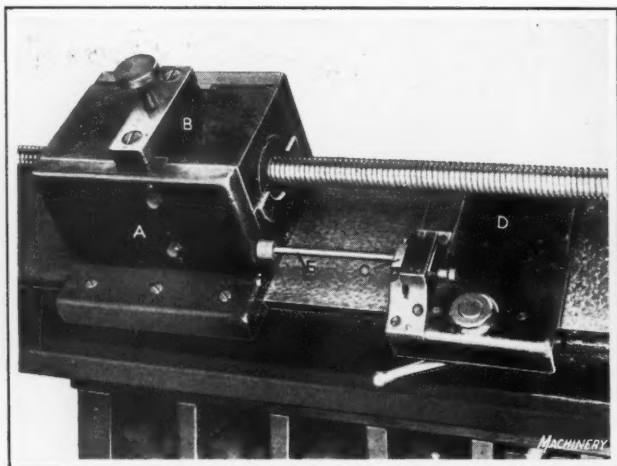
Setting the Carriage of the Lead-screw Testing Machine Relative to the Tailstock before making a Test
